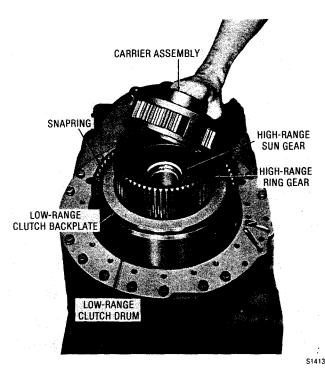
Installing high-range planetary carrier assembly (TRT-1)
